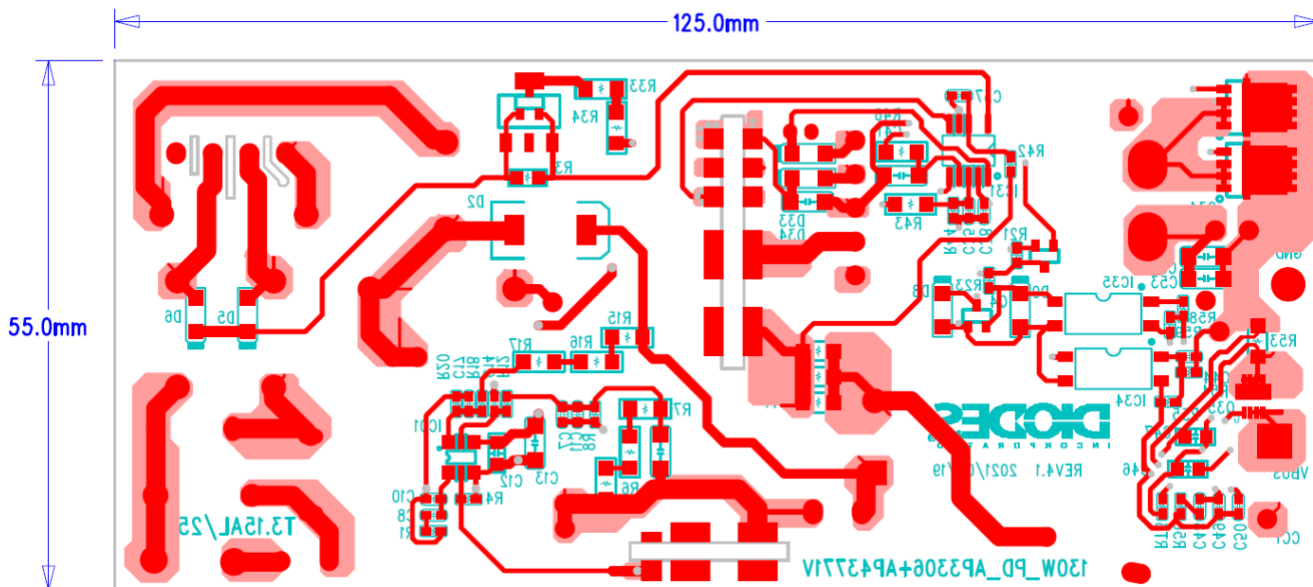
140W ACF+GaN PD3.0 Adapter EVB Main Board PCB Layout – Bottom View
